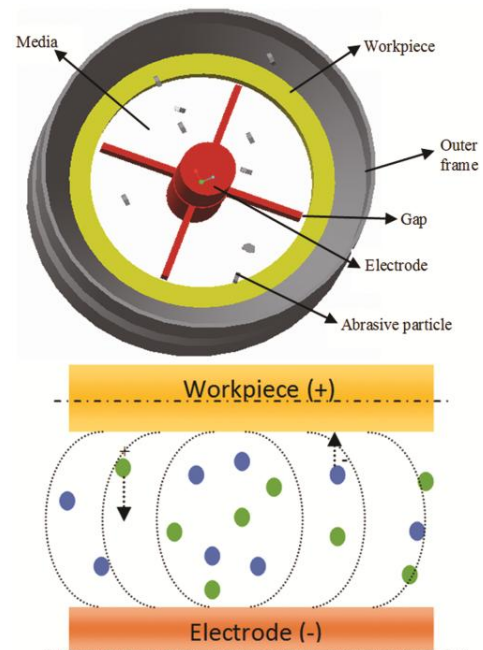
Mechanism of material removal in the developed TACAFM process.
